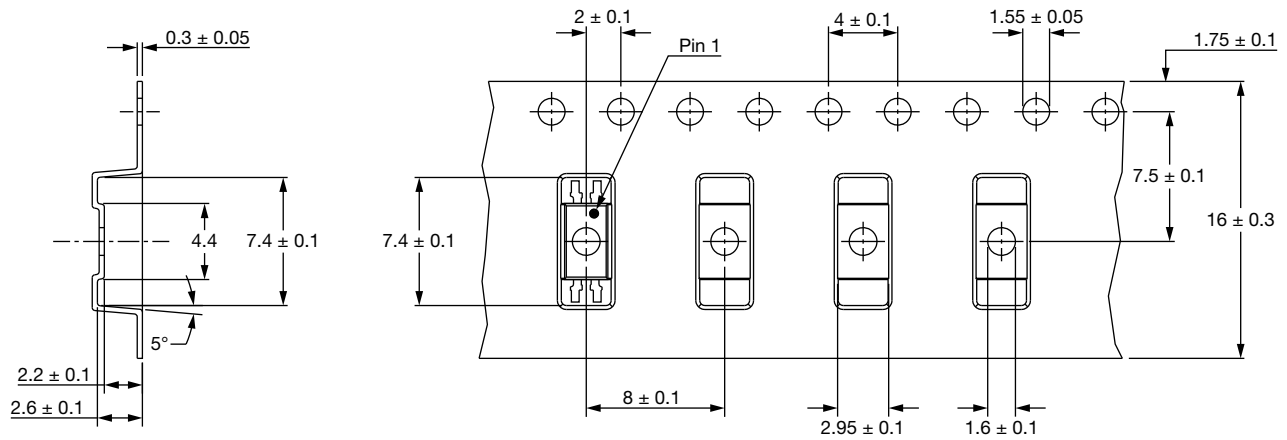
Tape and Reel Packing (3000 parts per reel)
